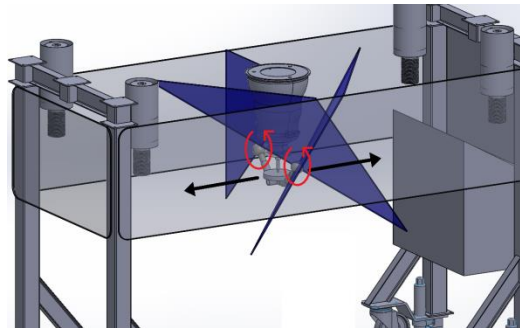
Cable robot with nozzle holder and spray areas of the flat fan nozzles
